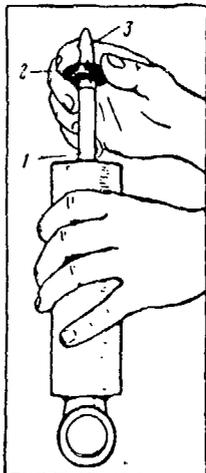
Using a Mandrel to Install Rubber Rod Bushing of Shock Absorber: 1, rod, 2, bushing, 3, mandrel.
